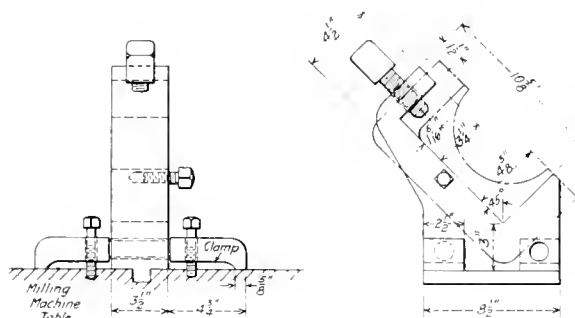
Jig for Holding the Brass for Milling the Grease Grooves
